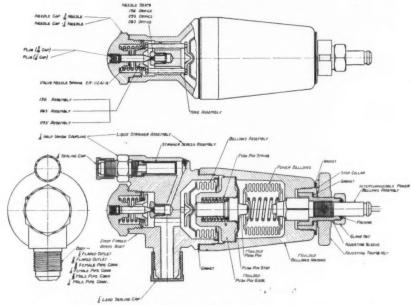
Fedders thermostatic expansion valve, showing in detail the various parts in this particular design of z thermostatic expansion valve.
